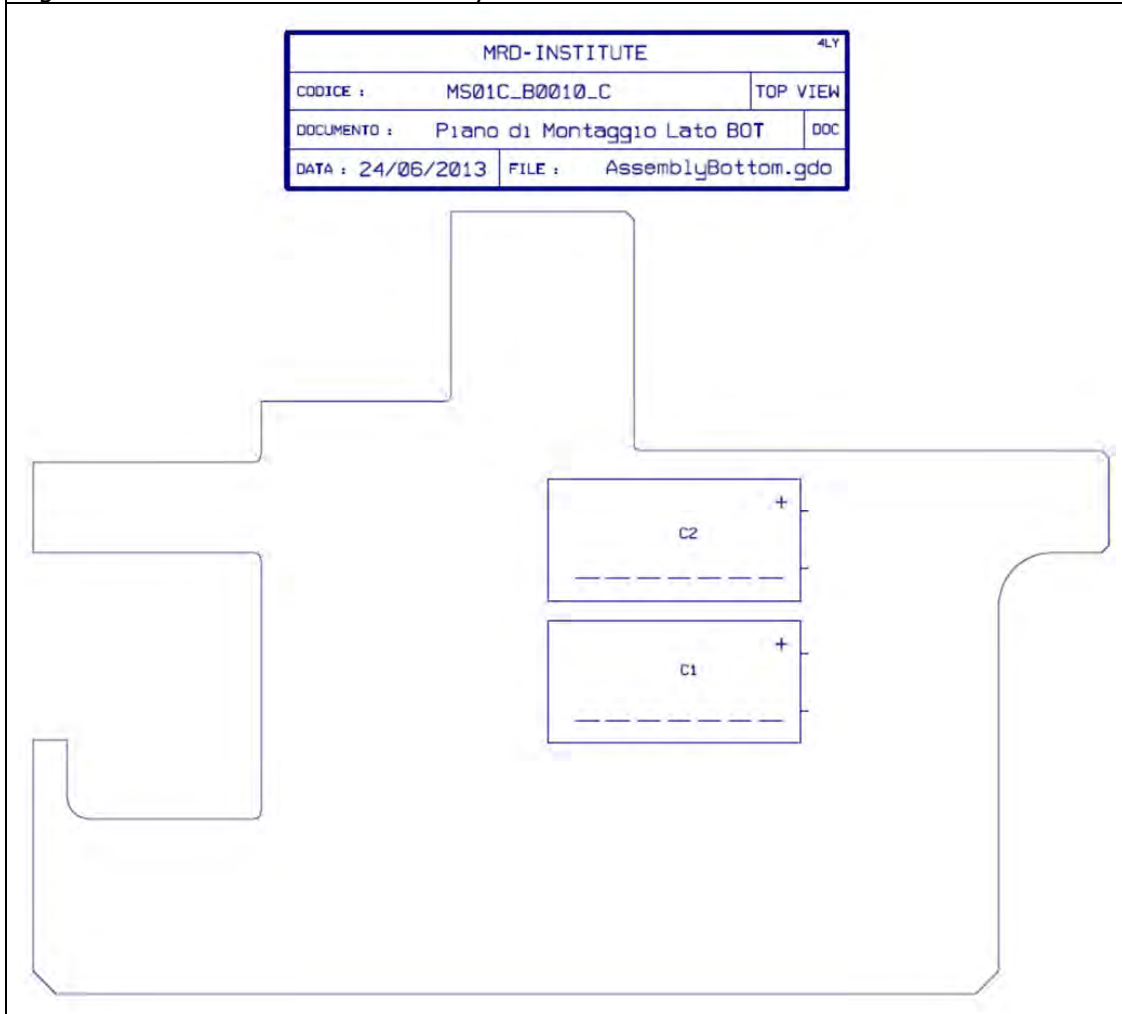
WMBUS 169MHz board layout: BOTTOM view
